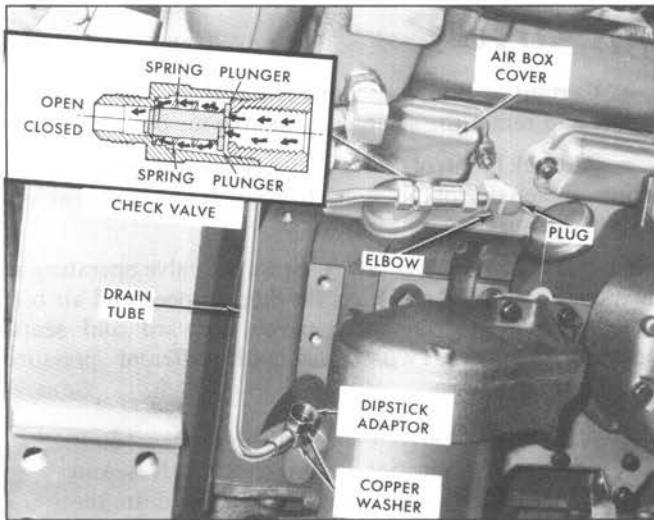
Former Closed Air Box Drain Tube and Check Valve System
